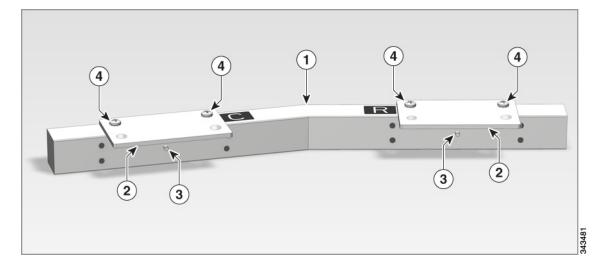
Attaching the Connector Plates to the Lower Right Tie Bar Assembly
